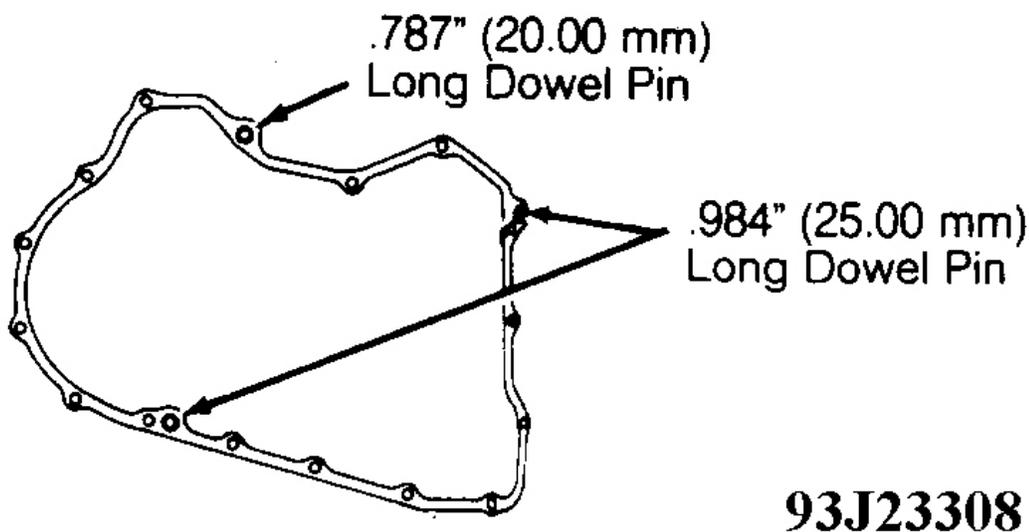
Installing Dowel Pins On Torque Converter Housing
